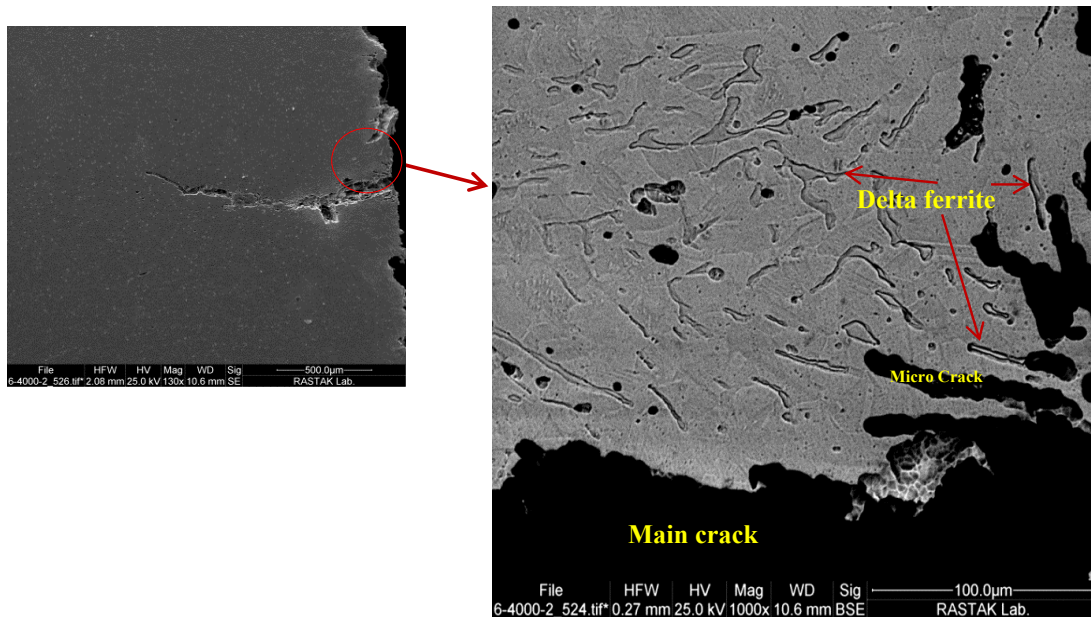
Edge cracks created during hot rolling of AISI304L steel.
